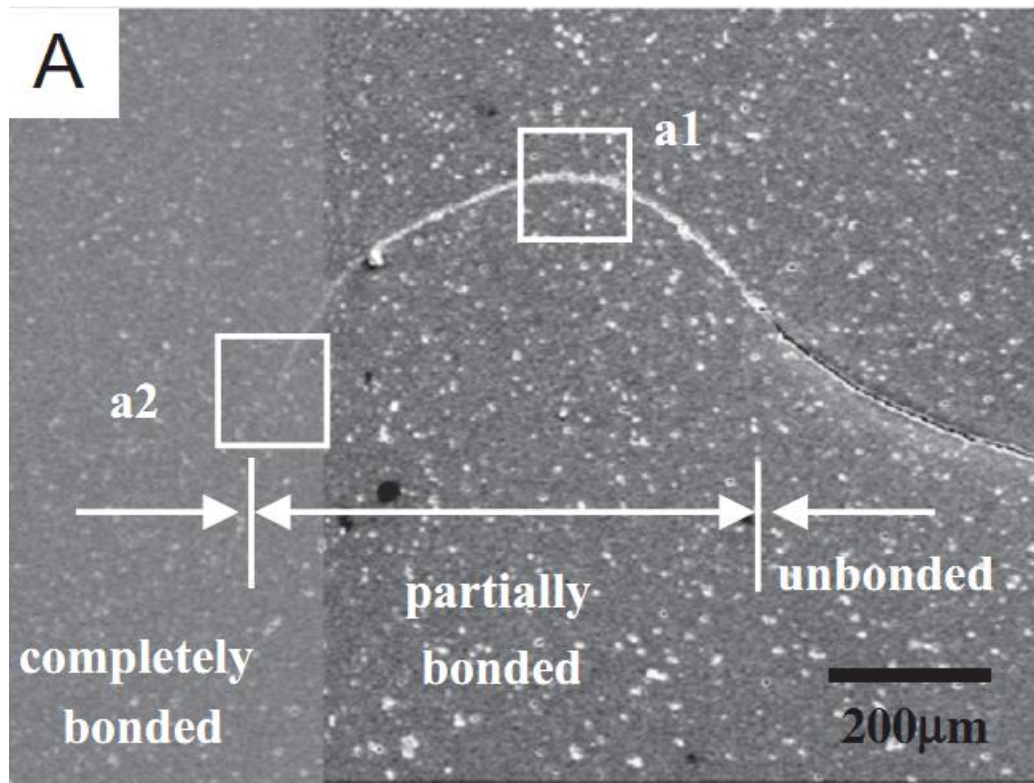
The hooking defect observed in a FSSW spot weld [Badarinarayan 142-148]
